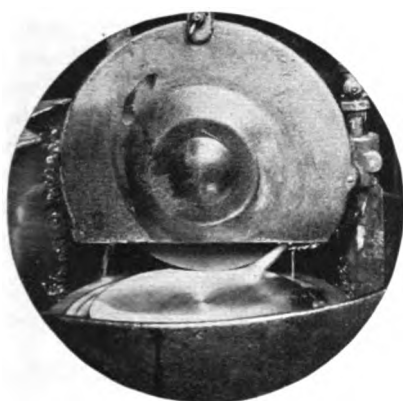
Rotary Surface Grinding on a Circular Surface Plate with an Alundum Wheel
